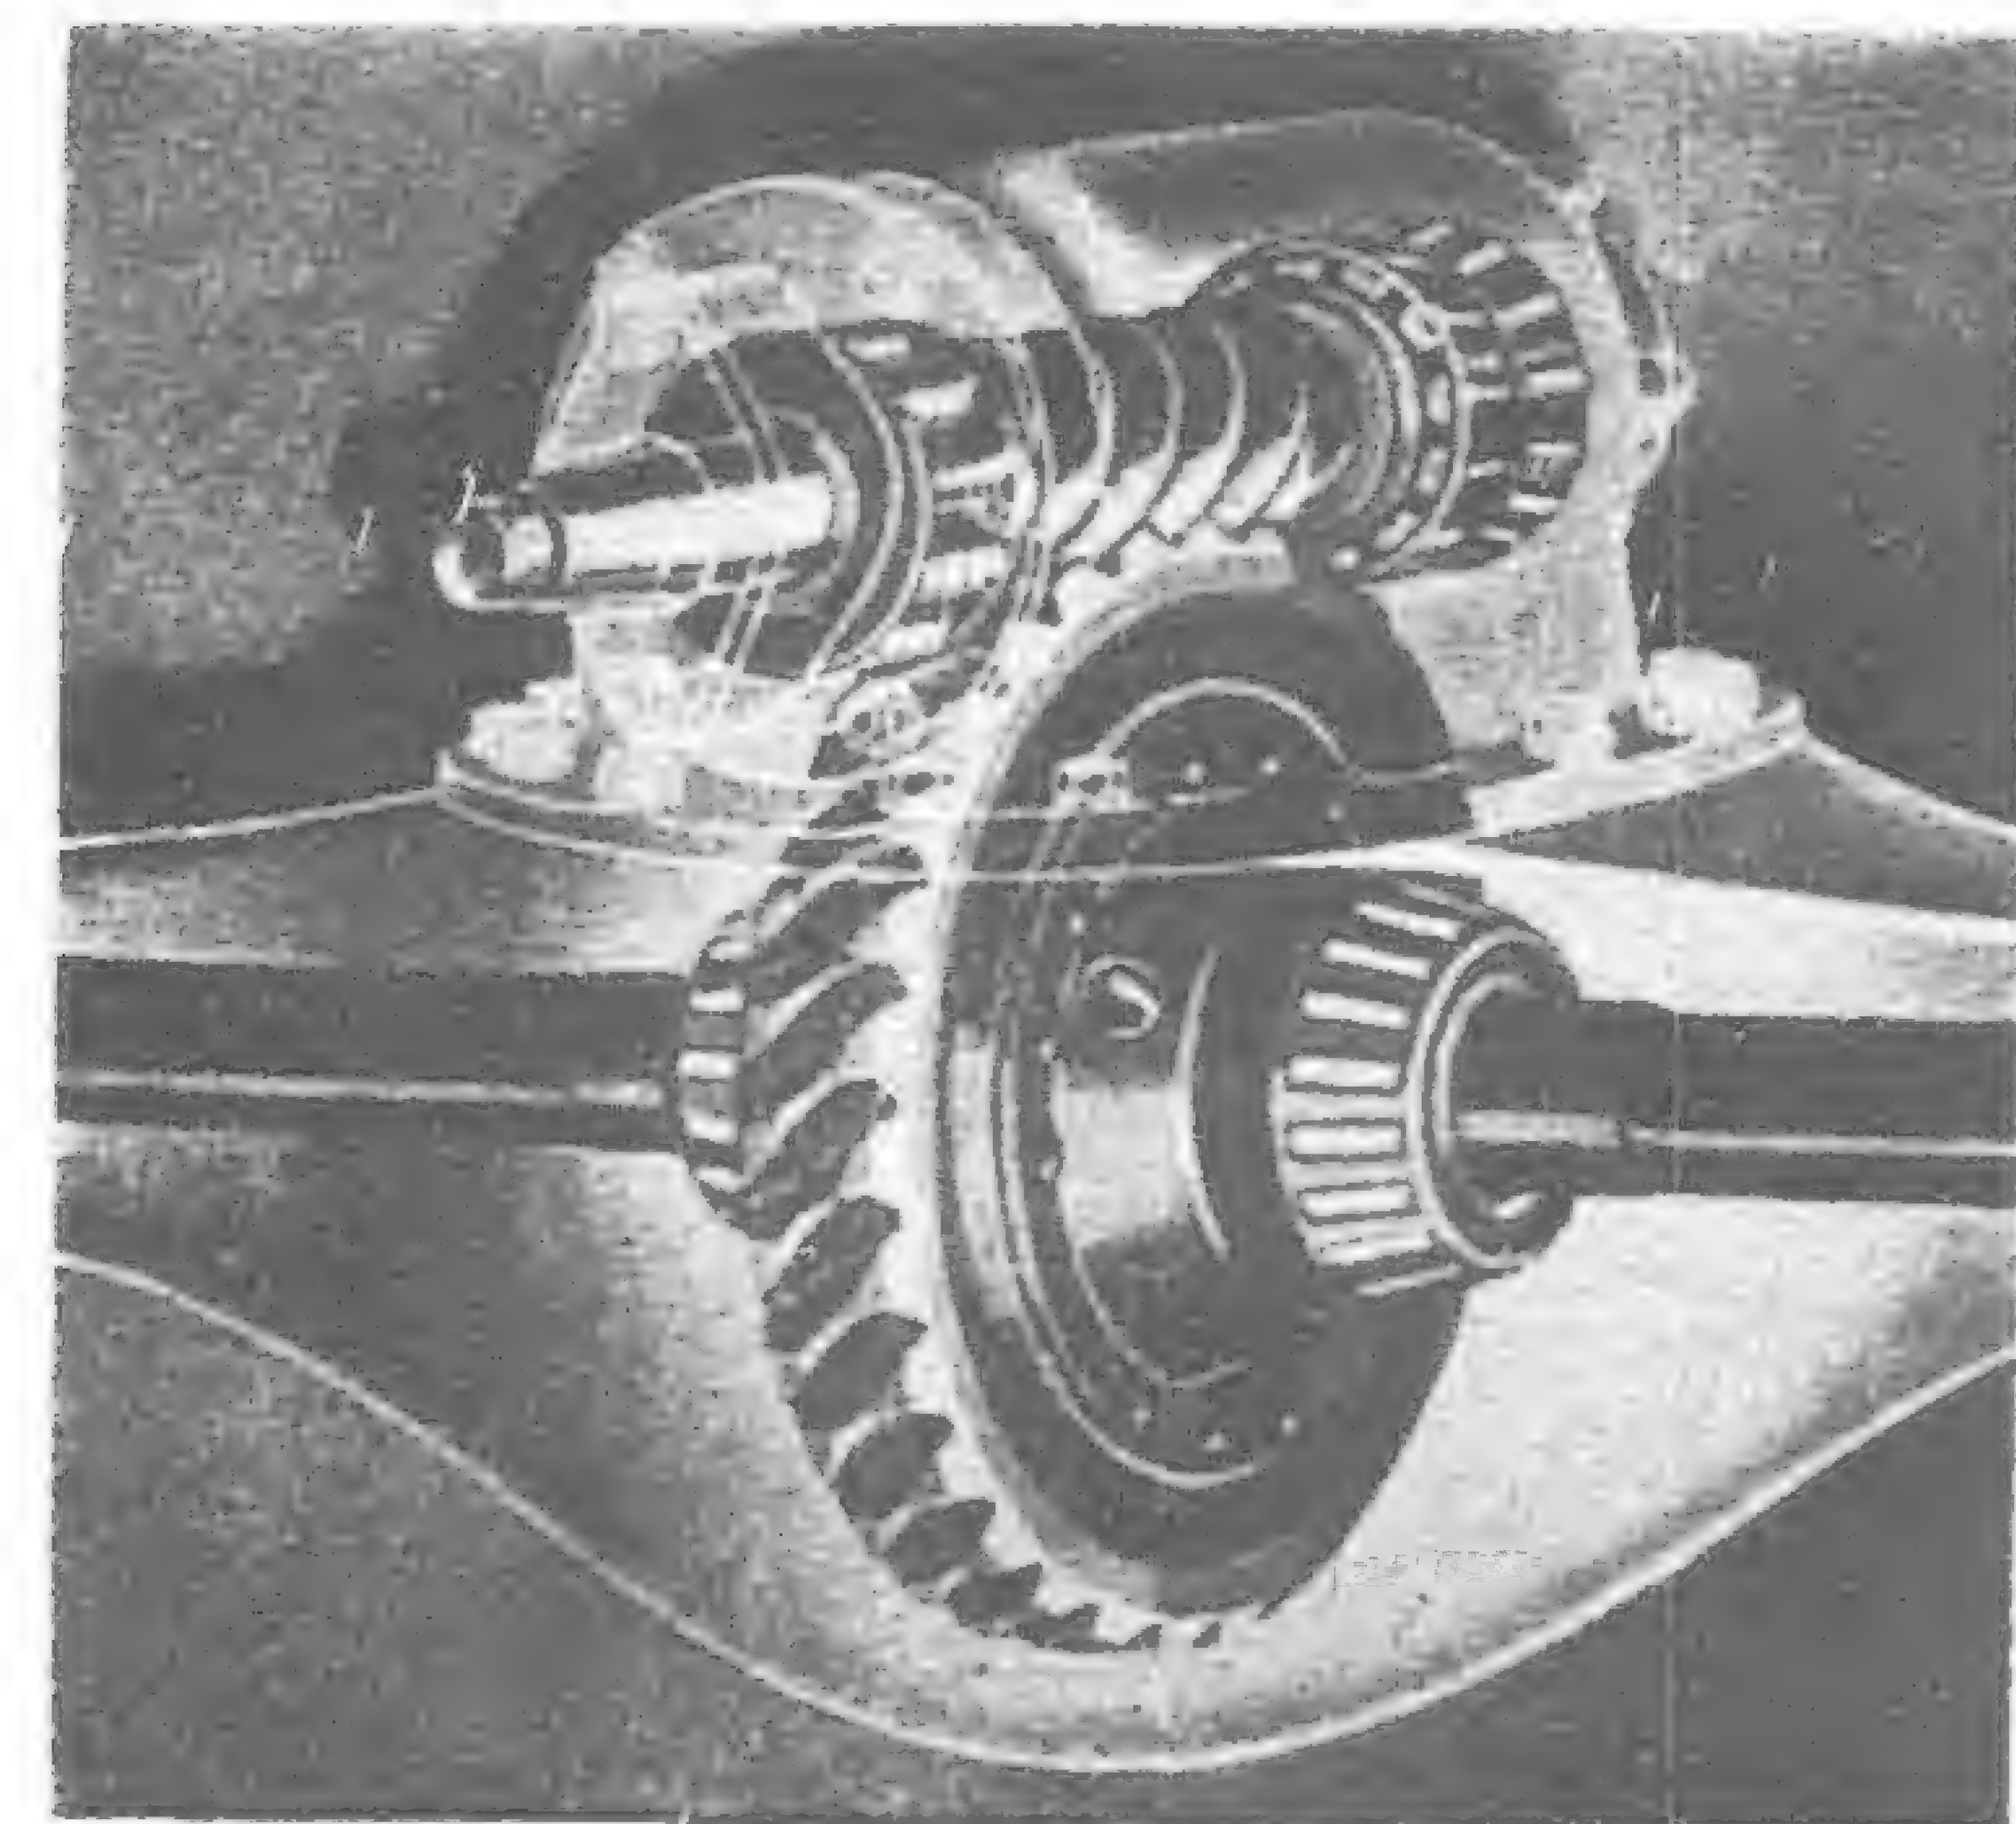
Heavy Duty Rear Axle Assembly. Nickel Alloy Steel and Nickel Bronze are used in this assembly
